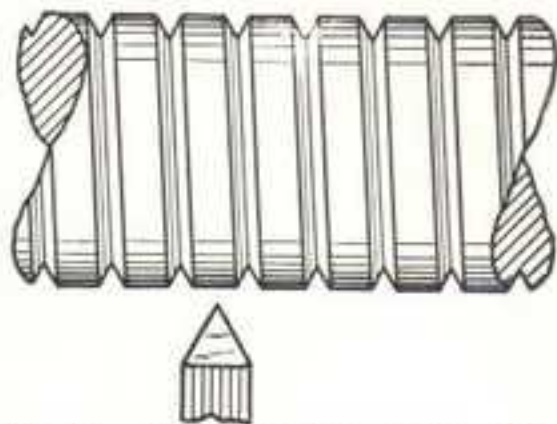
Adjusting Point of Threading Tool to Conform with Thread
